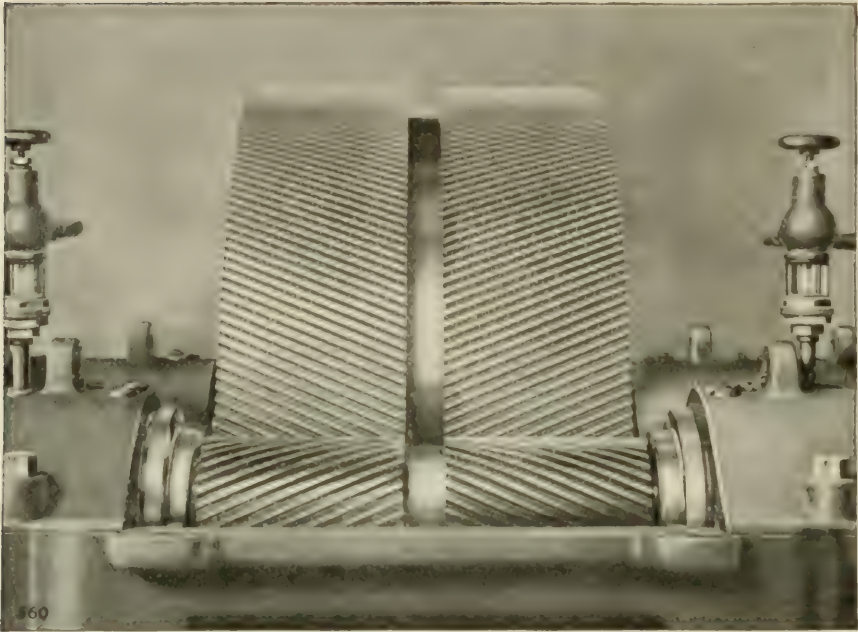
GEAR AND PINION OF THE DELAVAL MULTI-STAGE SINGLE GEARED TURBINE IN PLACE IN GEAR CASE
